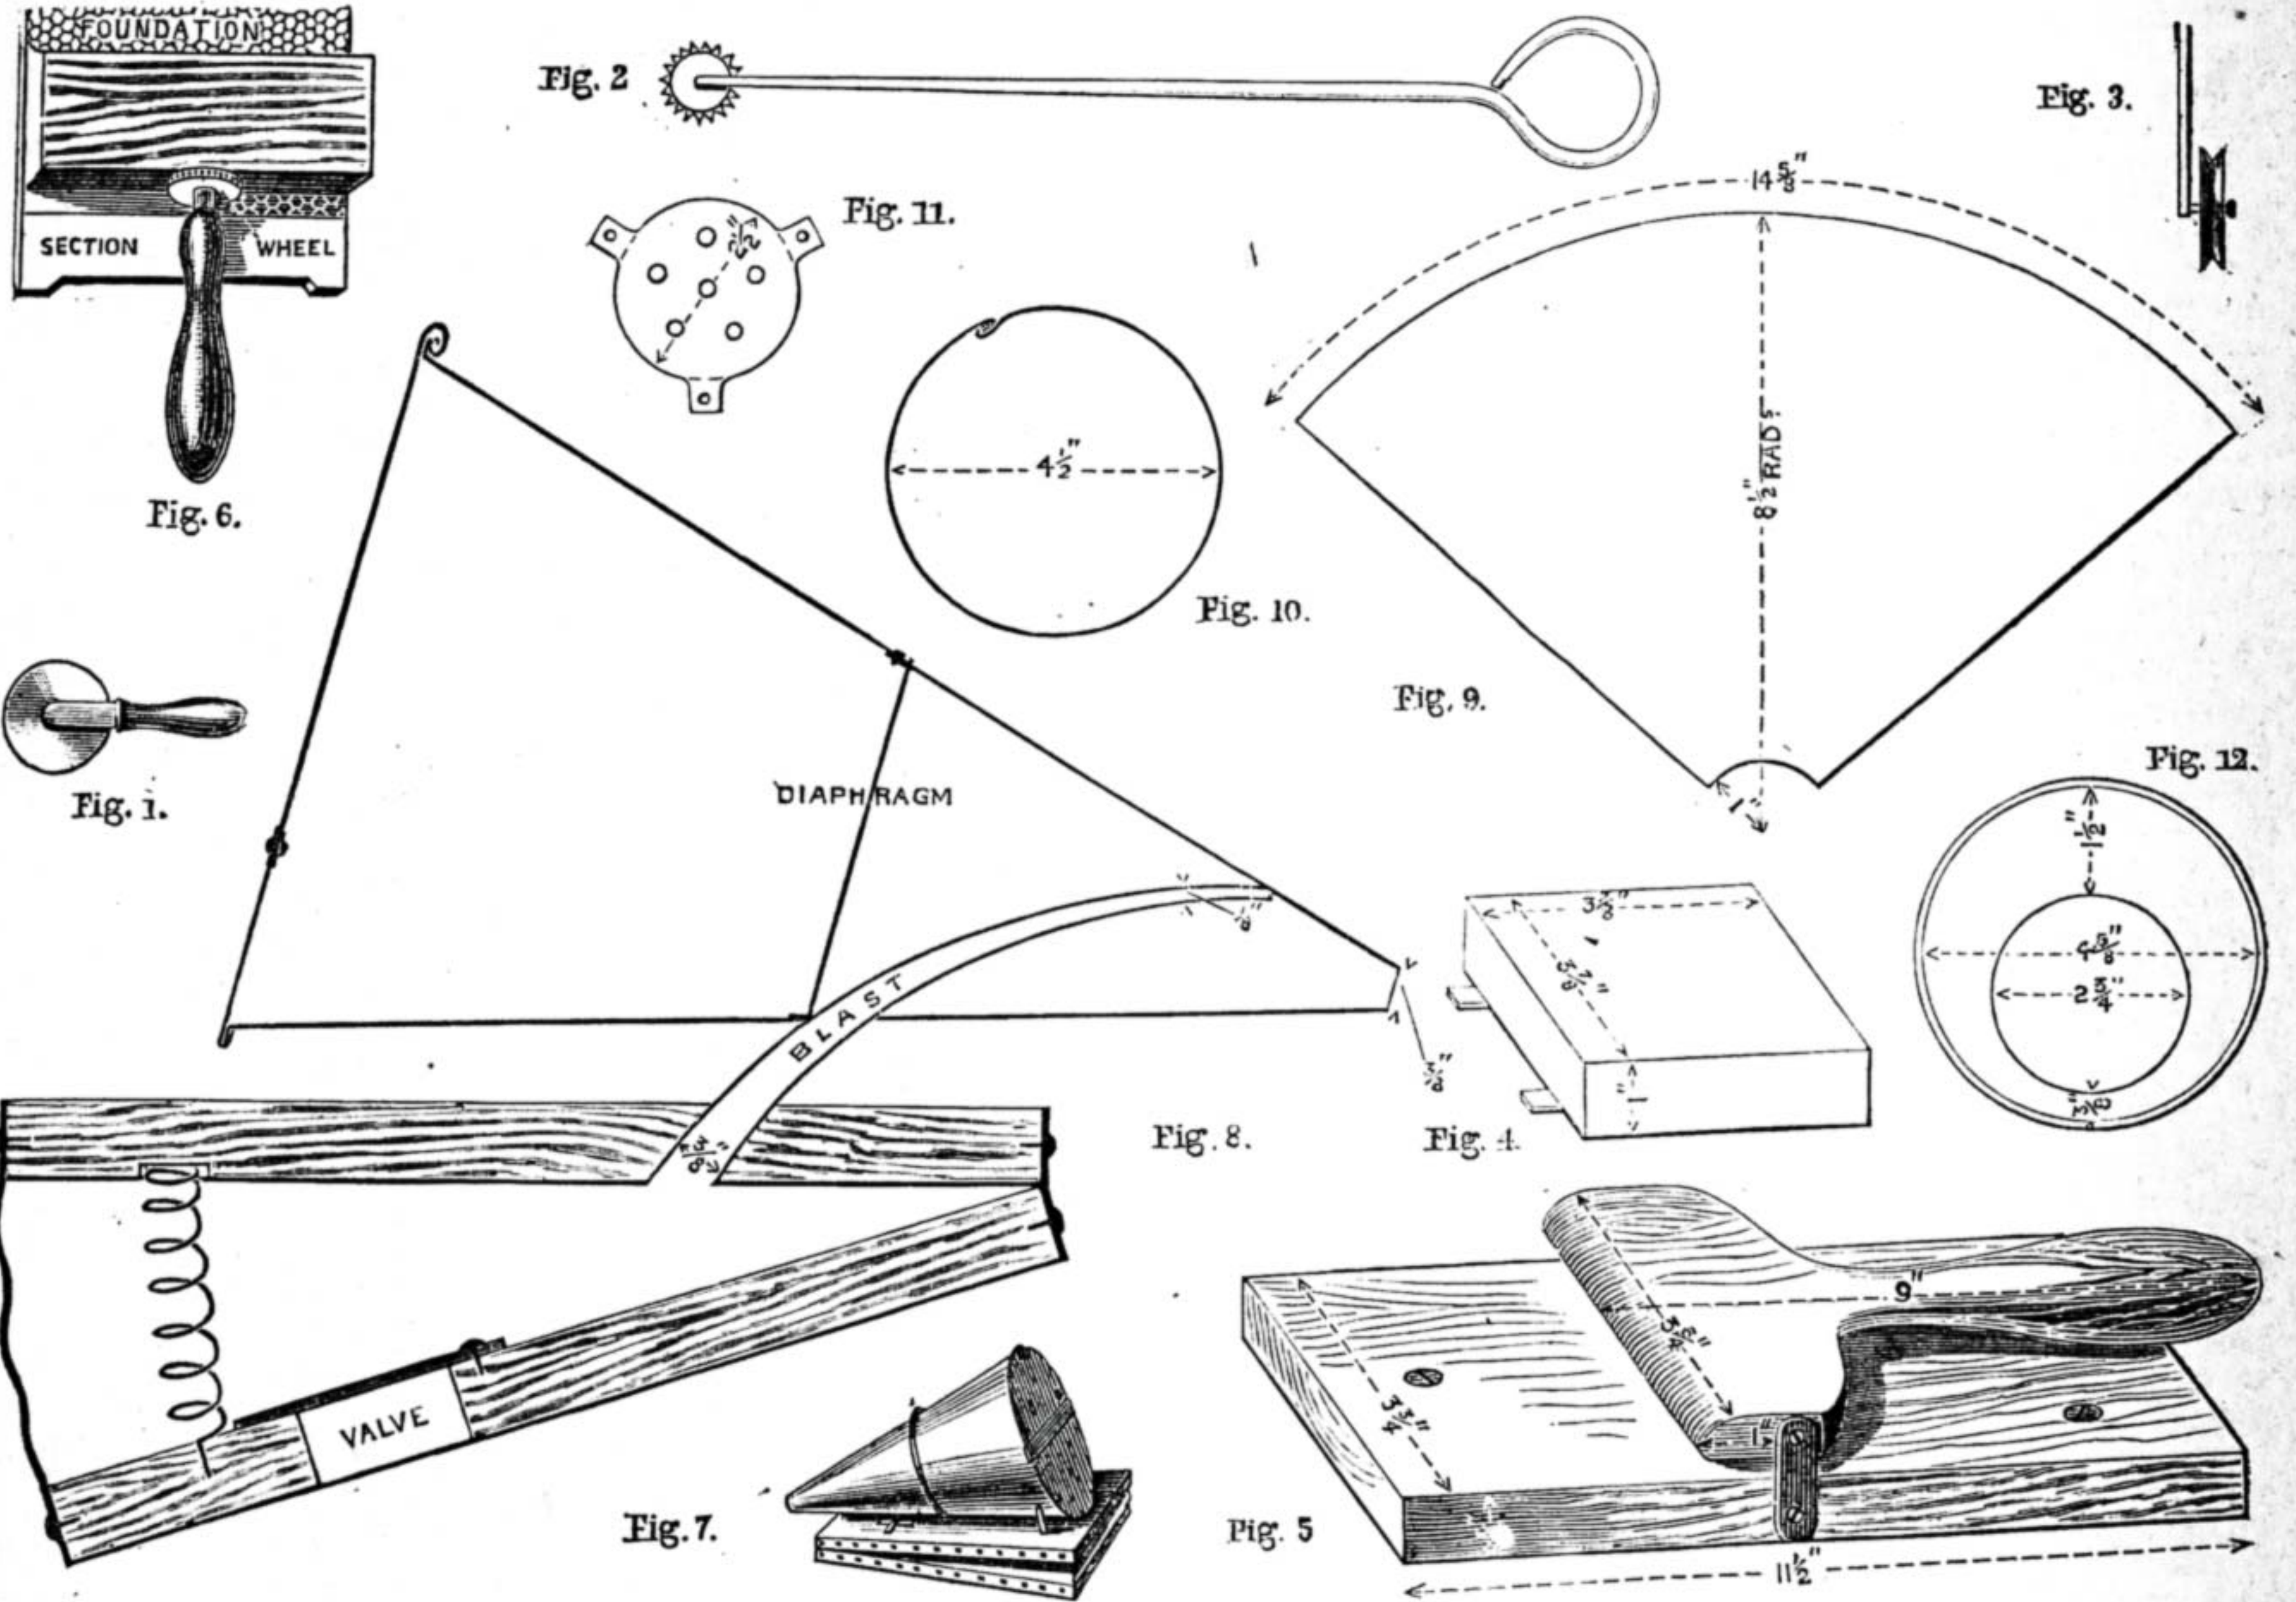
Curlin Foundation Cutter. Figs. 2, 3.—Woiblet Spur Embedder. Fig. 4.—Guide for fixing Foundations in Sections. Fig. 5.—Parker's Foundation Fixer. Fig. 6.—Abbott's Foundation Fixer. Fig. 7.—Clarke Smoker Complete. Fig. 8.—Section of Clarke Smoker. Fig. 9.—Pattern for Funnel. Fig. 10.—End of Funnel, showing Joint. Fig. 11.—Diaphragm with Tongues. Fig. 12.—Bottom of Funnel.
